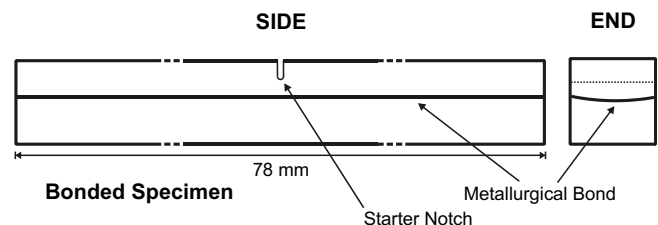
Schematic diagram of fatigue crack growth test specimen; end dimensions are 3.8 mm square.
